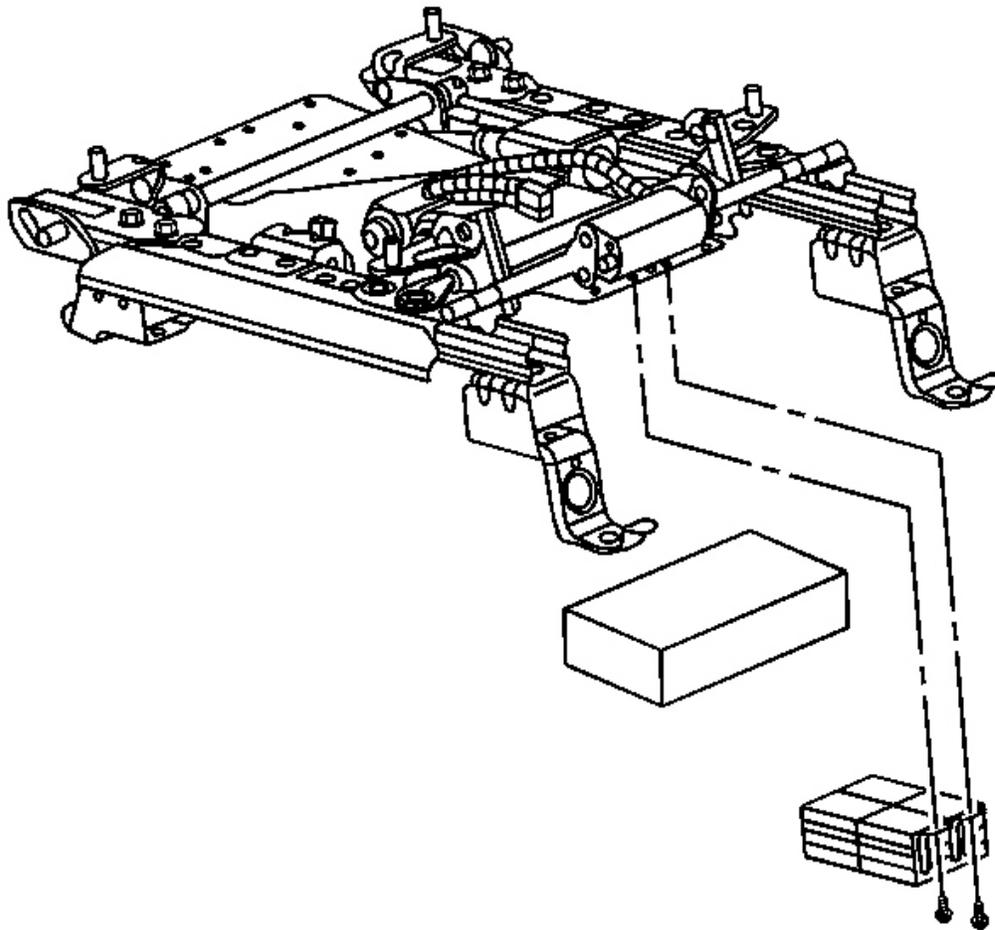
View Of Seat Climate Control Module - Passenger Side
